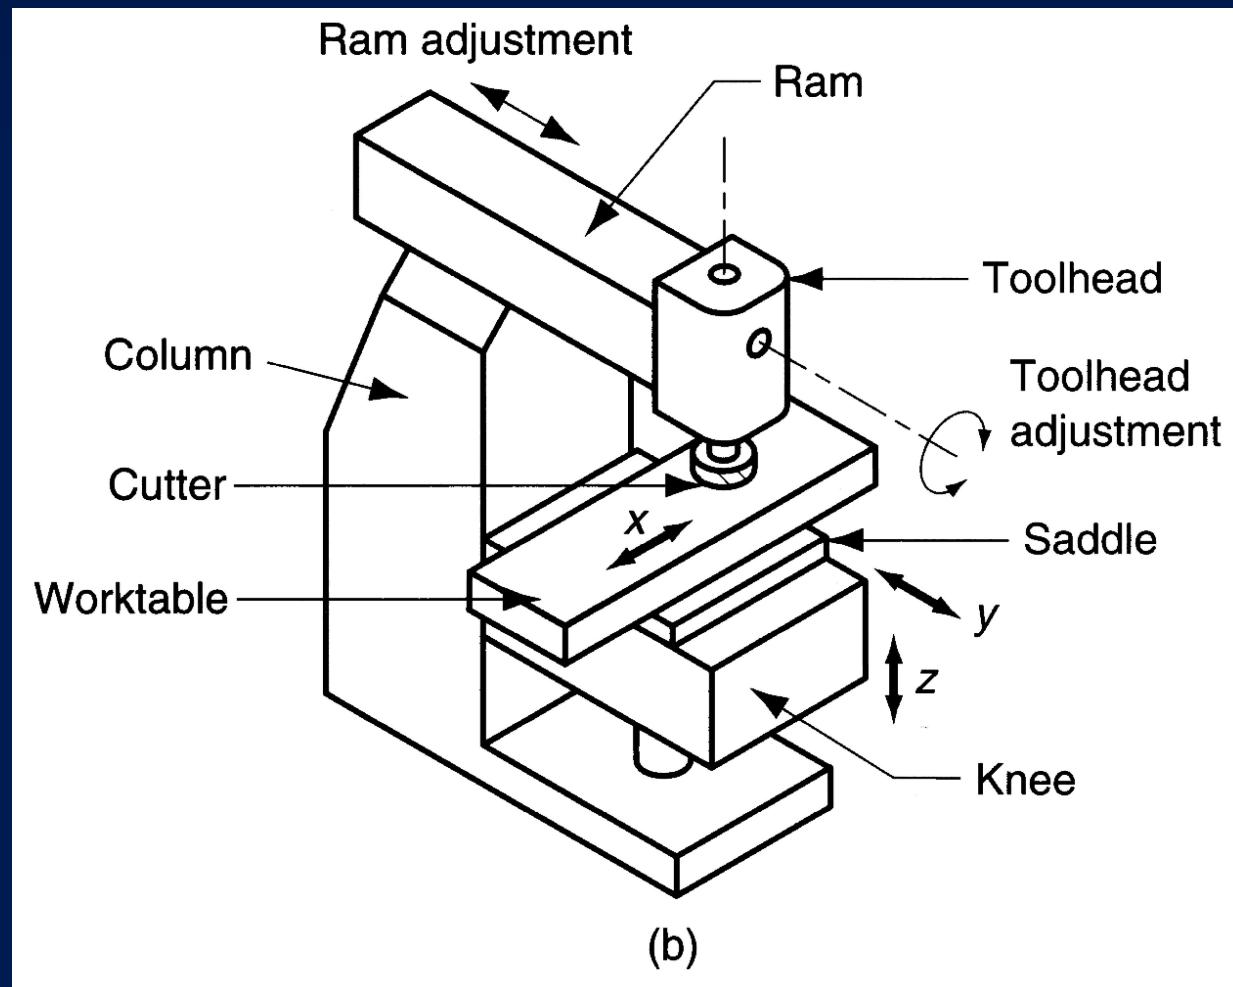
(b) ram type knee-and-column machine; ram can be adjusted in and out, and toolhead can be swiveled
